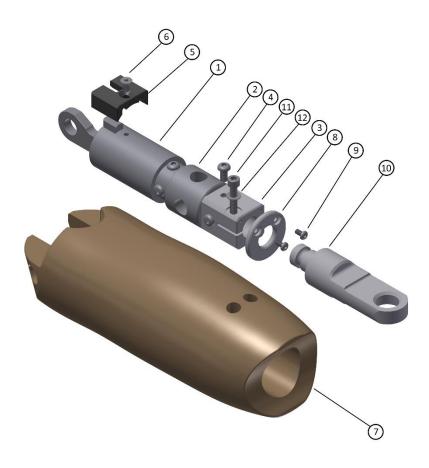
Upper Arm Assembly, SD3 Exploded View
